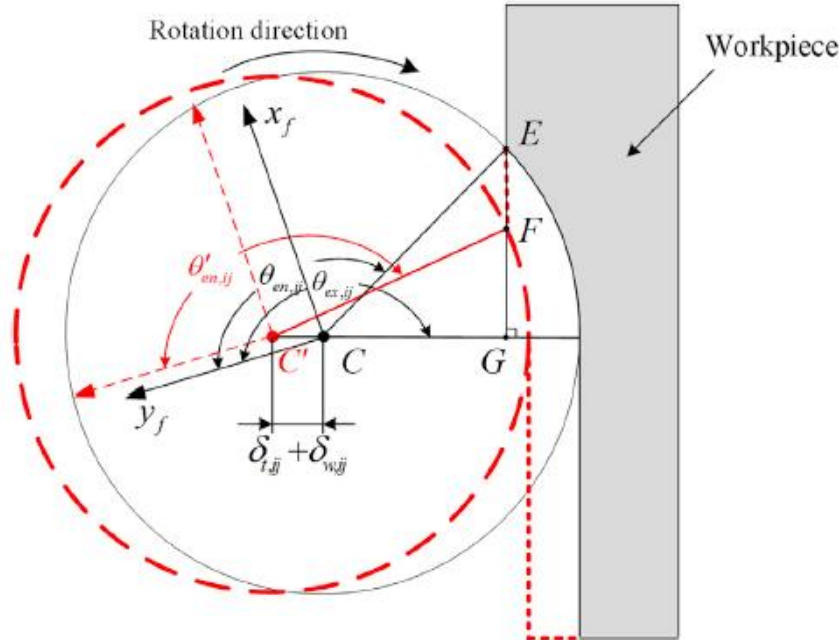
The entry angle for the i_{th} cutting element of cutting tool during the five axis milling of thin walled workpiece [24]
